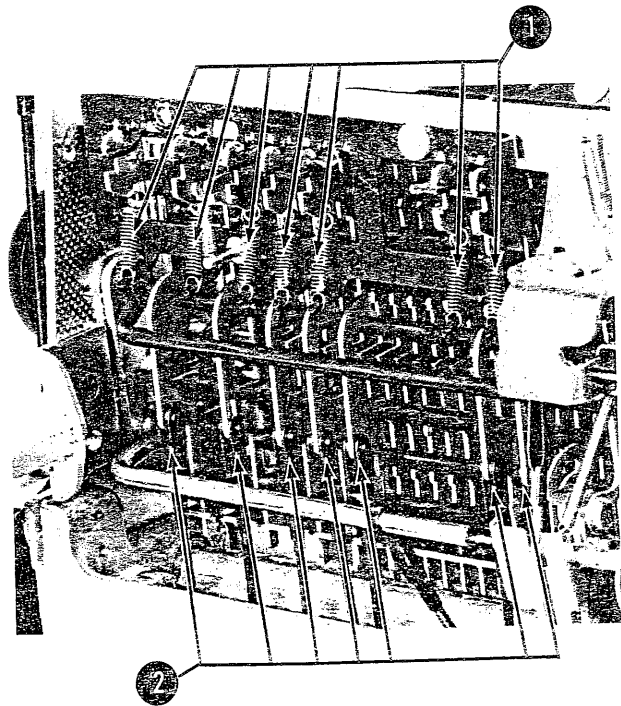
Differential-Plate Removal (Steps 3 and 4)
